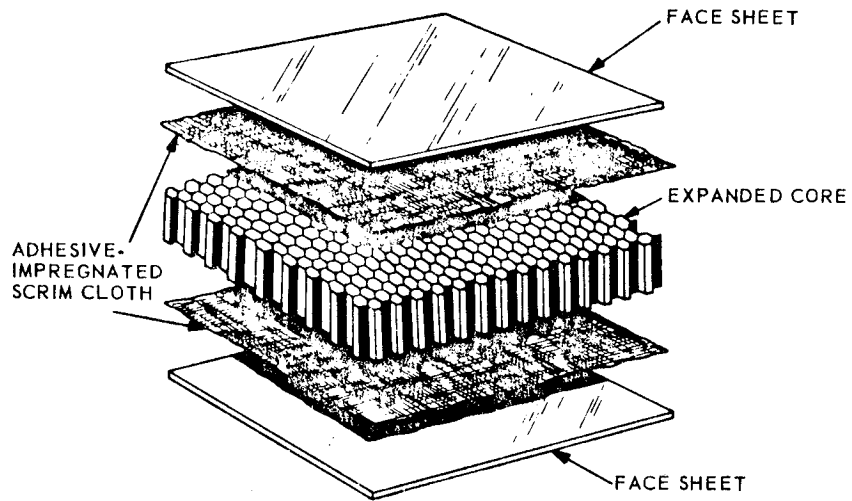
TYPICAL HONEYCOMB SANDWICH CONSTRUCTION
